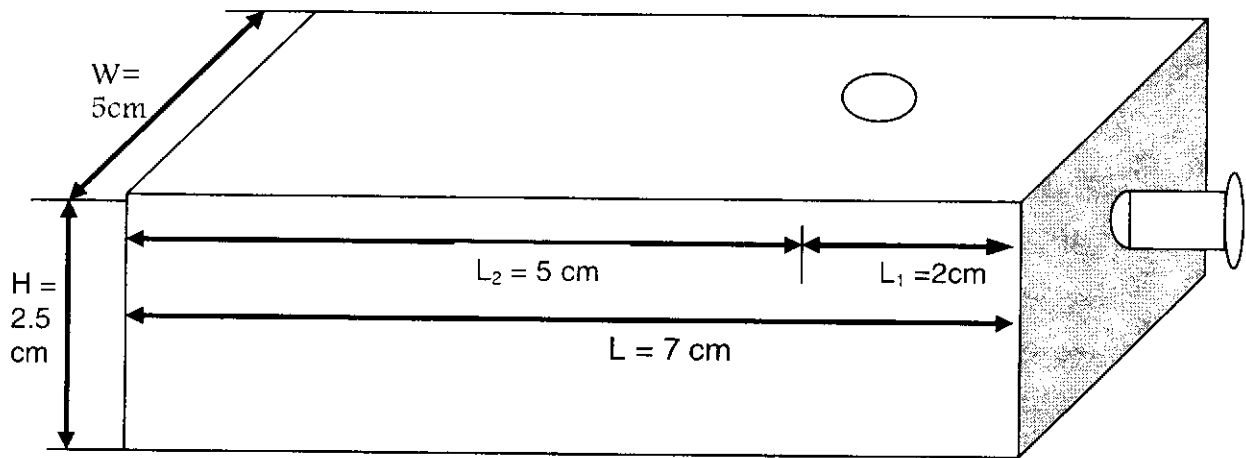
Fabrication sketch for a wooden or metal block with screw attachment to lock the Pitot Tube position.
